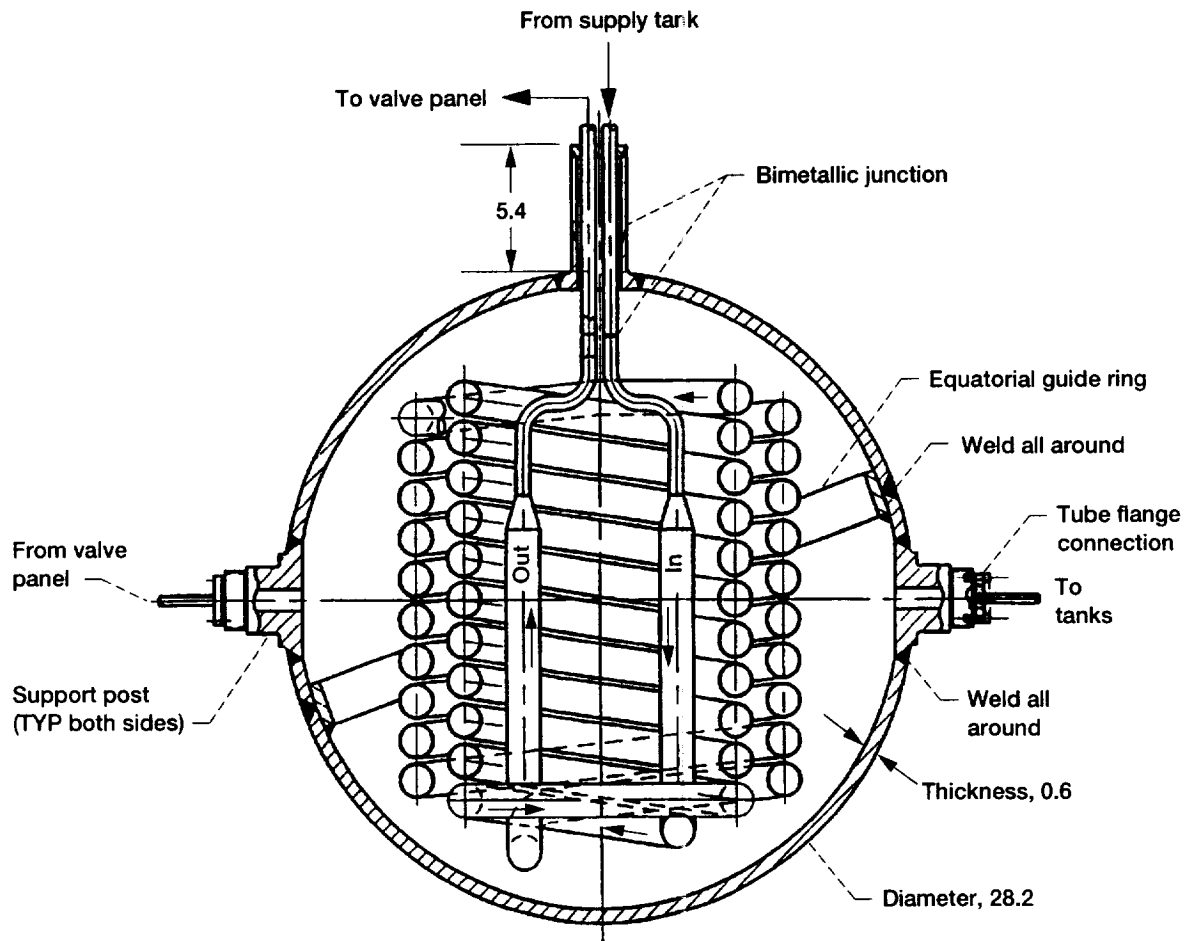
Vaporizer bottle cross section. Dimensions are in inches.
